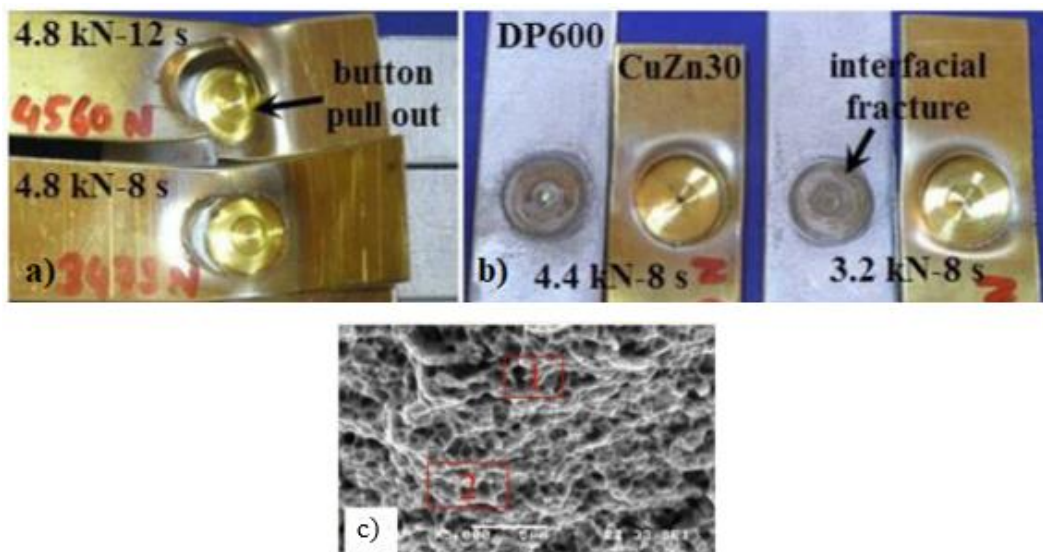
Failed welds with different failing modes: a) button pull-out, b) interfacial, and c) SEM image of the fractured sample, adapted [47].
